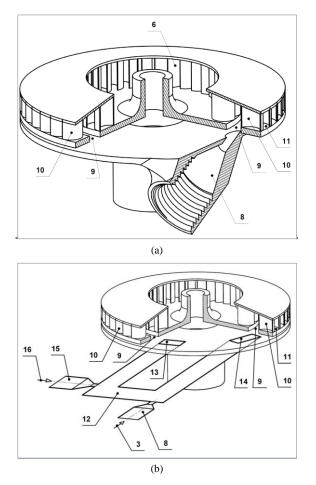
Impeller with nozzle diaphragm in the assembly (3D model - isometric): a - Patent No. 213280 [6]; b - Patent No. 214113 [34]
